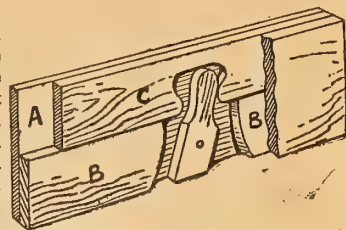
The sliding bar, with the pivoted catch piece raised to open the box.
